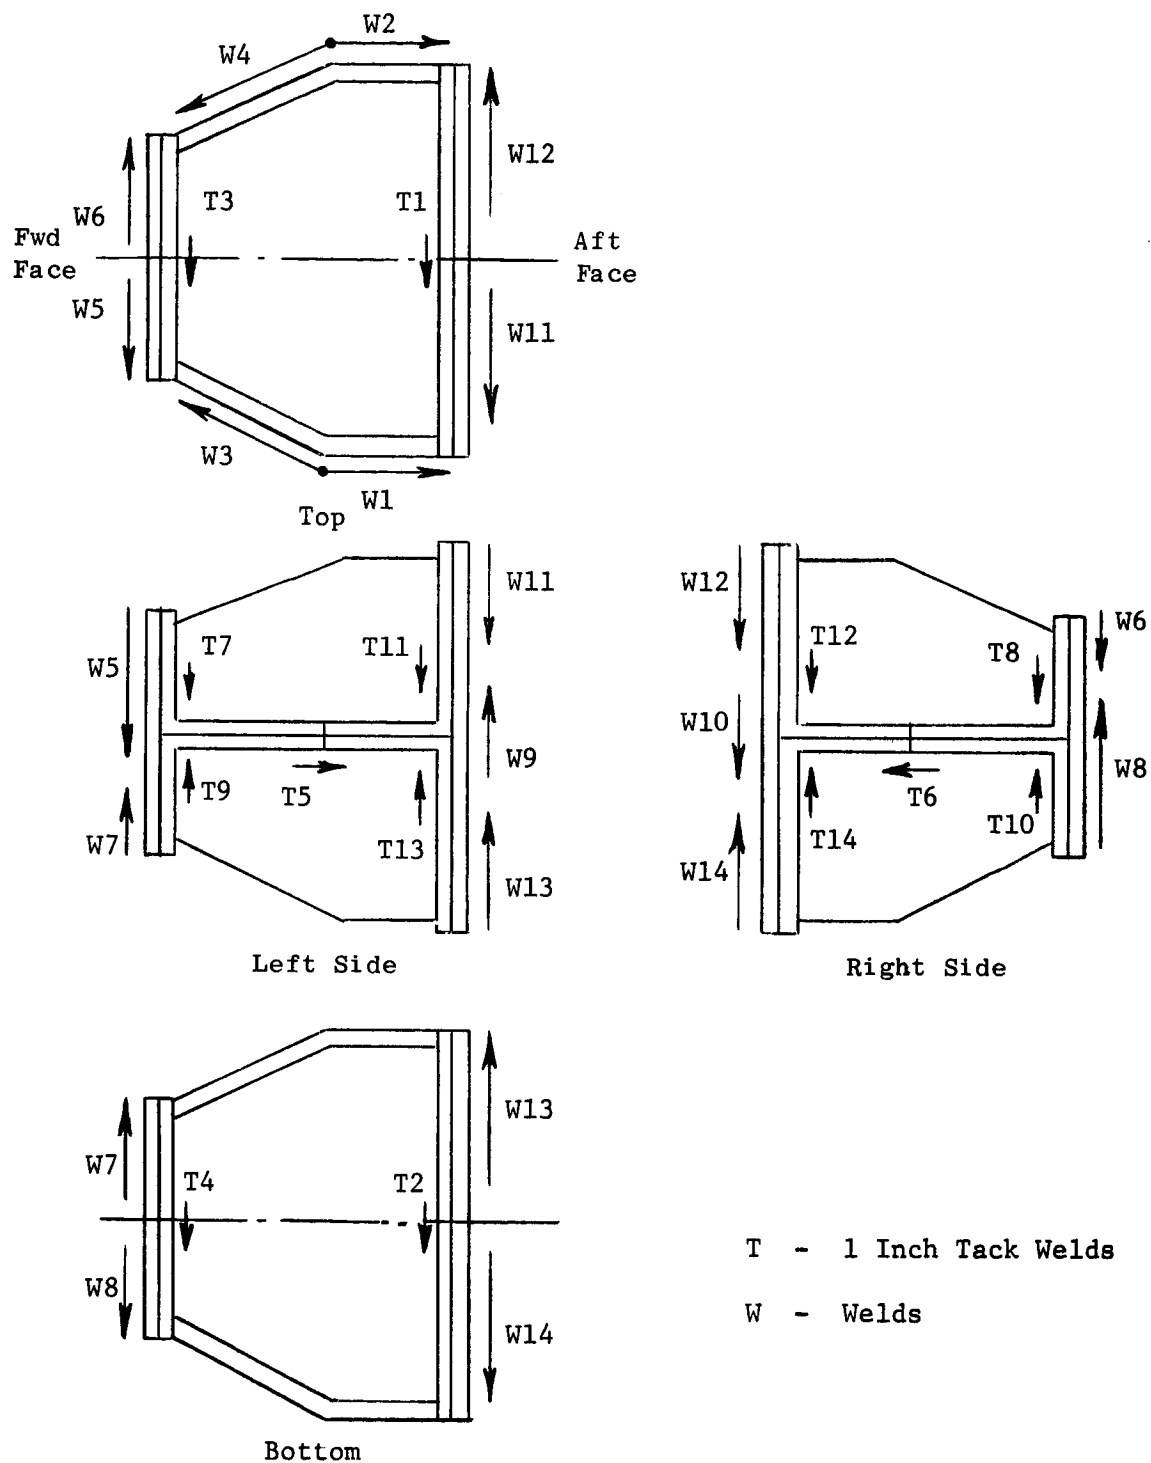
Turbine Casing, Welding Sequence.
